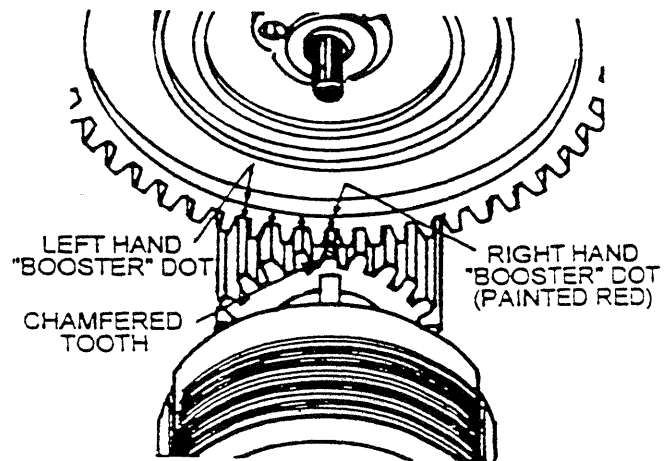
Correct Meshing of Distributor and Drive Gears – Clockwise S6RN Type Magneto With Retard Contact Illustrated
